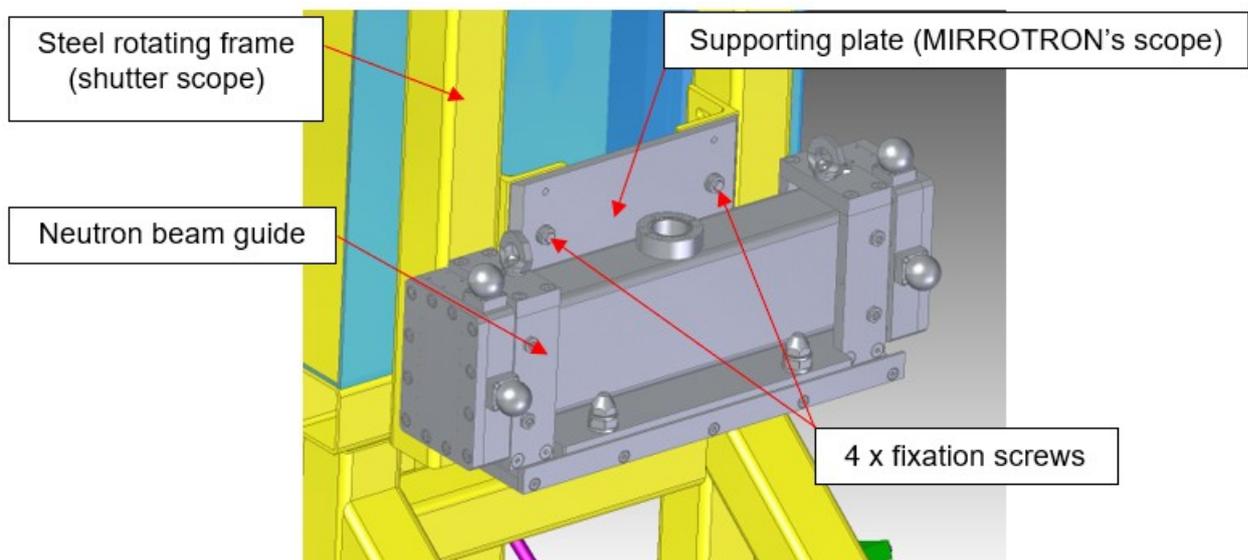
3D view of the shutter neutron beam guide fixed to the rotating steel supporting frame
